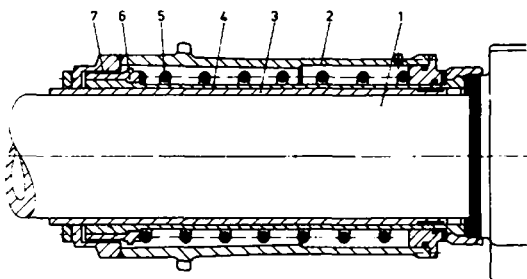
Combined recoil brake/spring recuperator mechanism, concentric about the gun tube (simplified representation).
